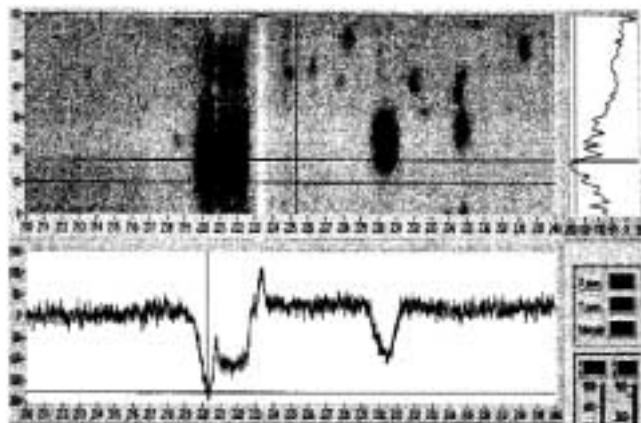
Pipe wall scan through both pipe walls: (a) radiographic image; (b) wall profiles and thickness presentation across one pipe scan line.<sup>16</sup>
